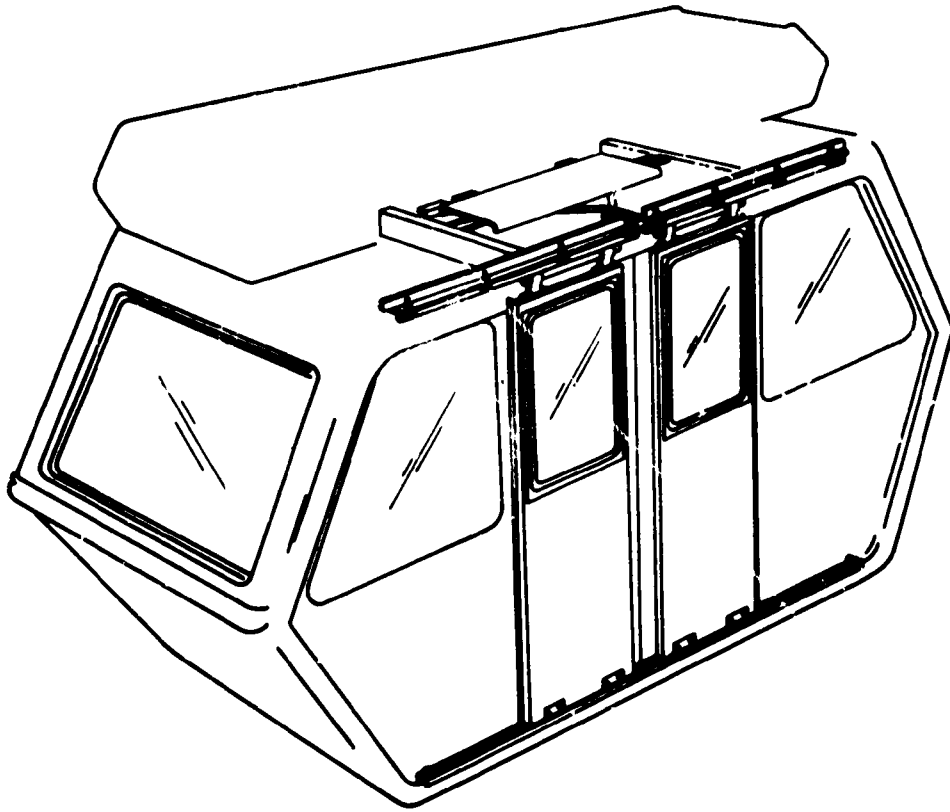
DETAILS OF JETRAIL DOORS
